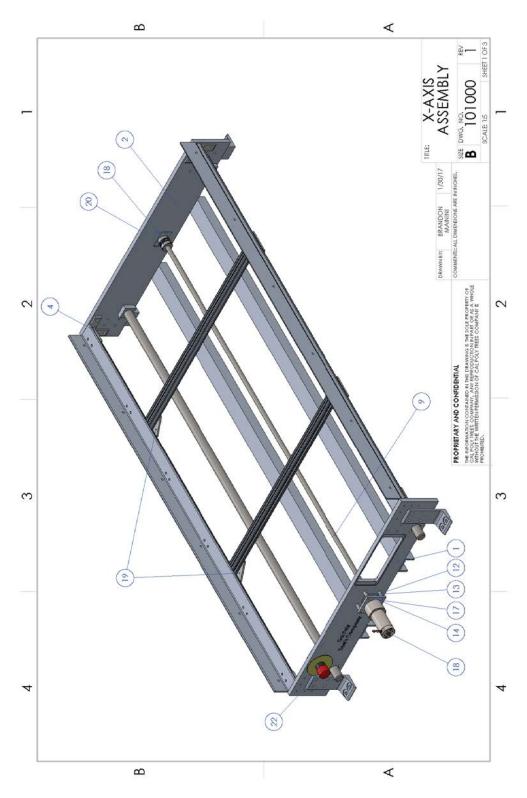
X-Axis Assembly Drawing Sheet 1 of 3
